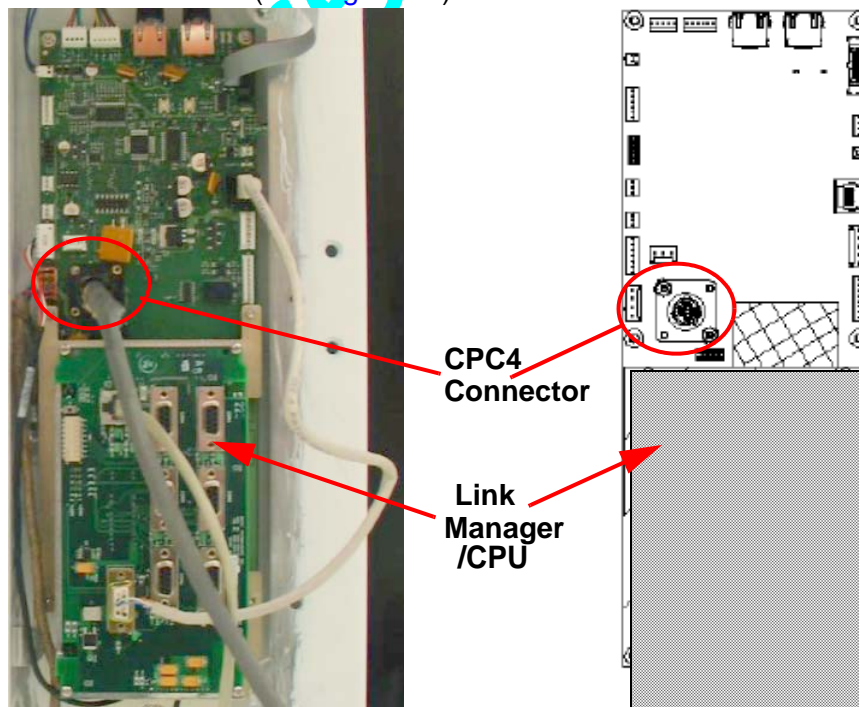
Static Entry Node PCB Assembly with Link Manager/CPU
